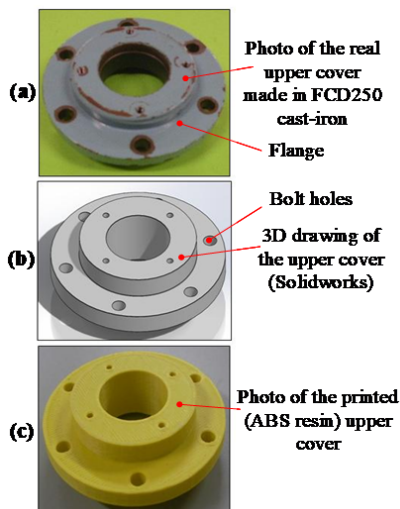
(a) Photo of the real cover, (b) 3D drawing of the upper cover, and (c) photo of the 3D printed cover in ABS resin, illustrating the design process of the upper cover
